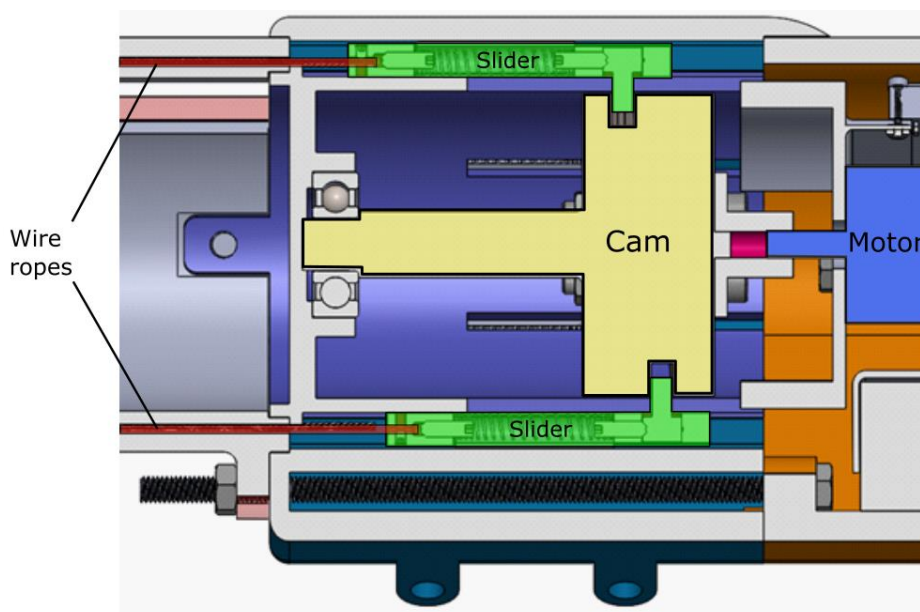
A cross section of the device showing two out of six sliders with their pin in the cam slot. A bearing supports the cam on the left and allows rotation while also transferring the friction force of the transport mechanism wire ropes to the housing. On the right the motor coupling, motor mount, and motor cross section are displayed.
